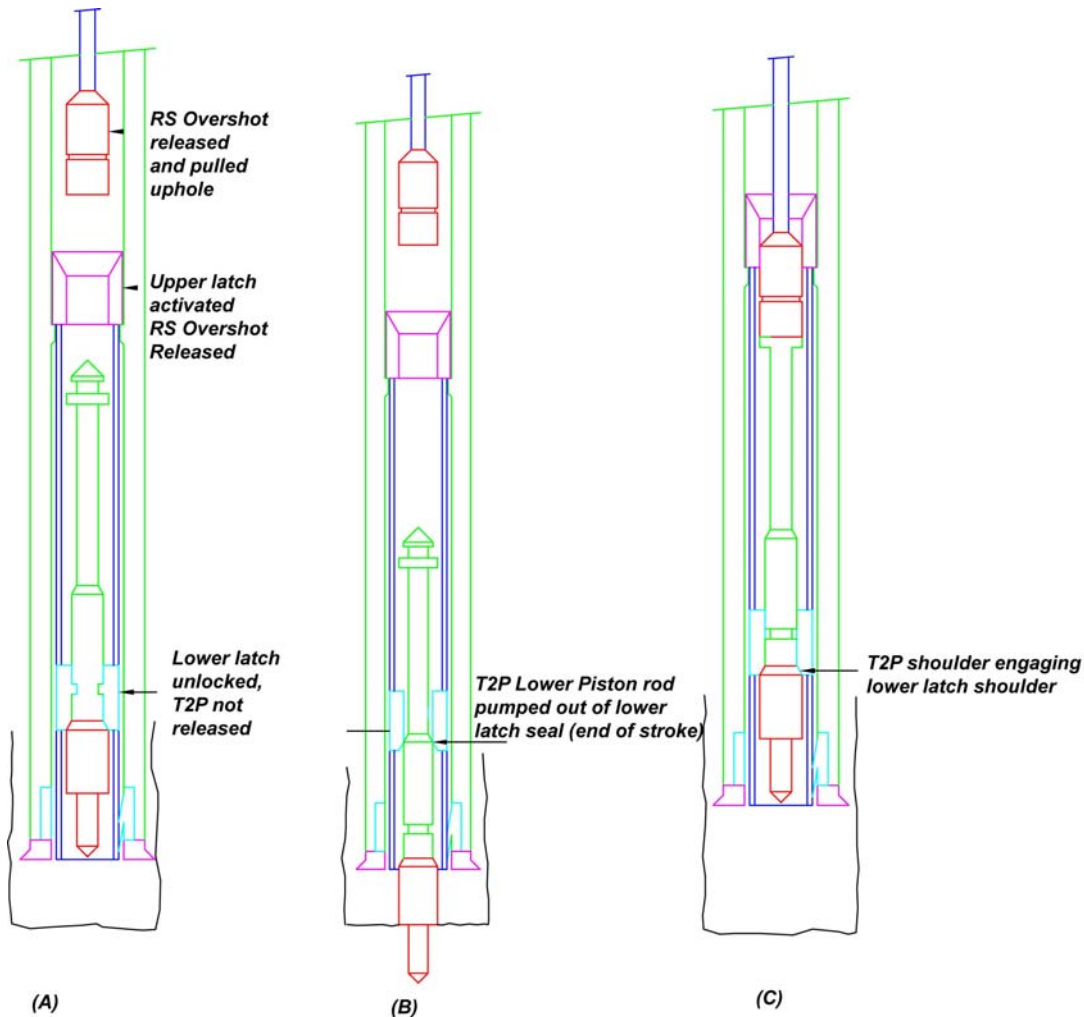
Three stages of Penetrometer Deployment: A) RS overshoot and lower latch released. B) Drill String Pressurized to pump penetrometer out of BHA and into formation, C) Penetrometer raised with wireline to engage deployment tool.
